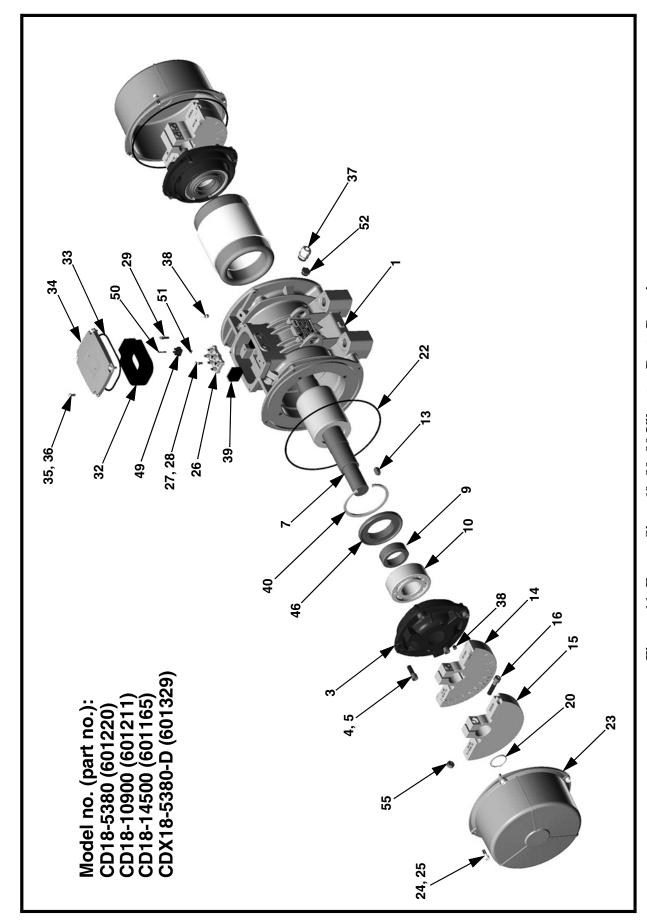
Frame Sizes 60, 80, 90 Vibrator Parts Drawing
